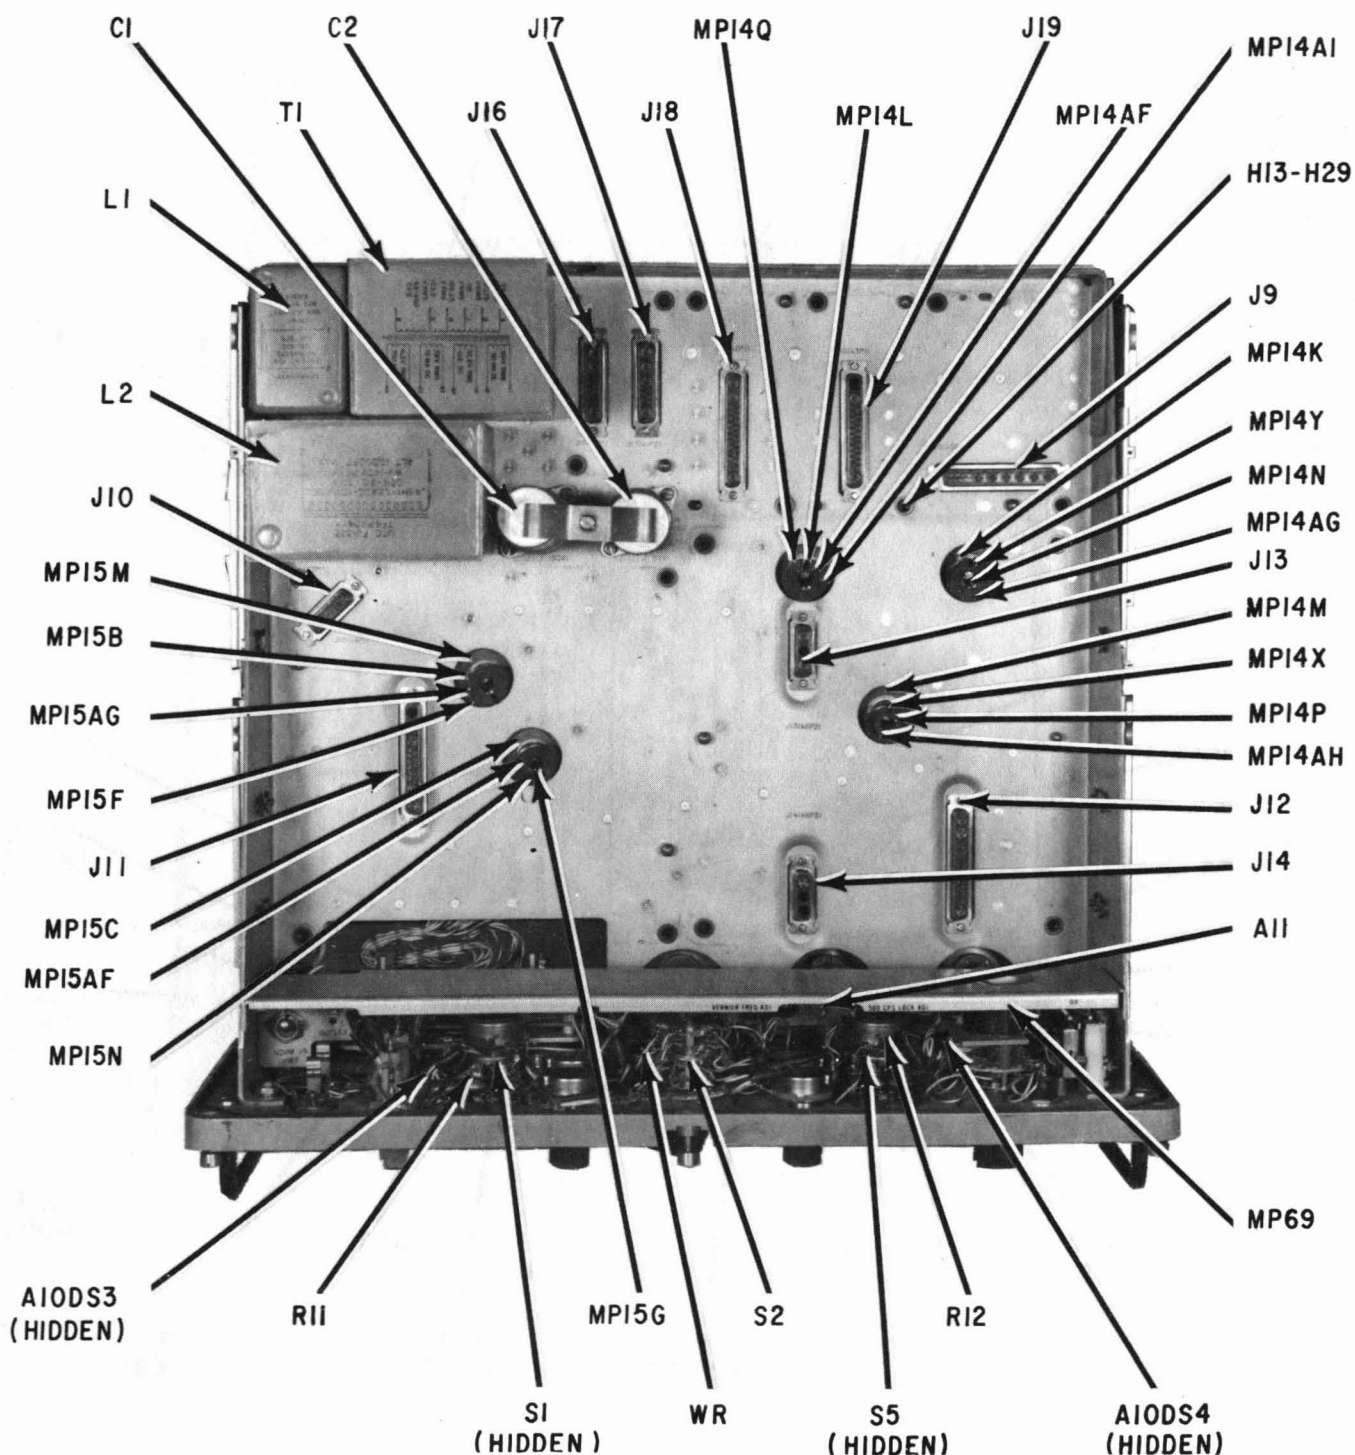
R-1051/URR Chassis Main Frame, Top View, Assemblies Removed, Component Location
